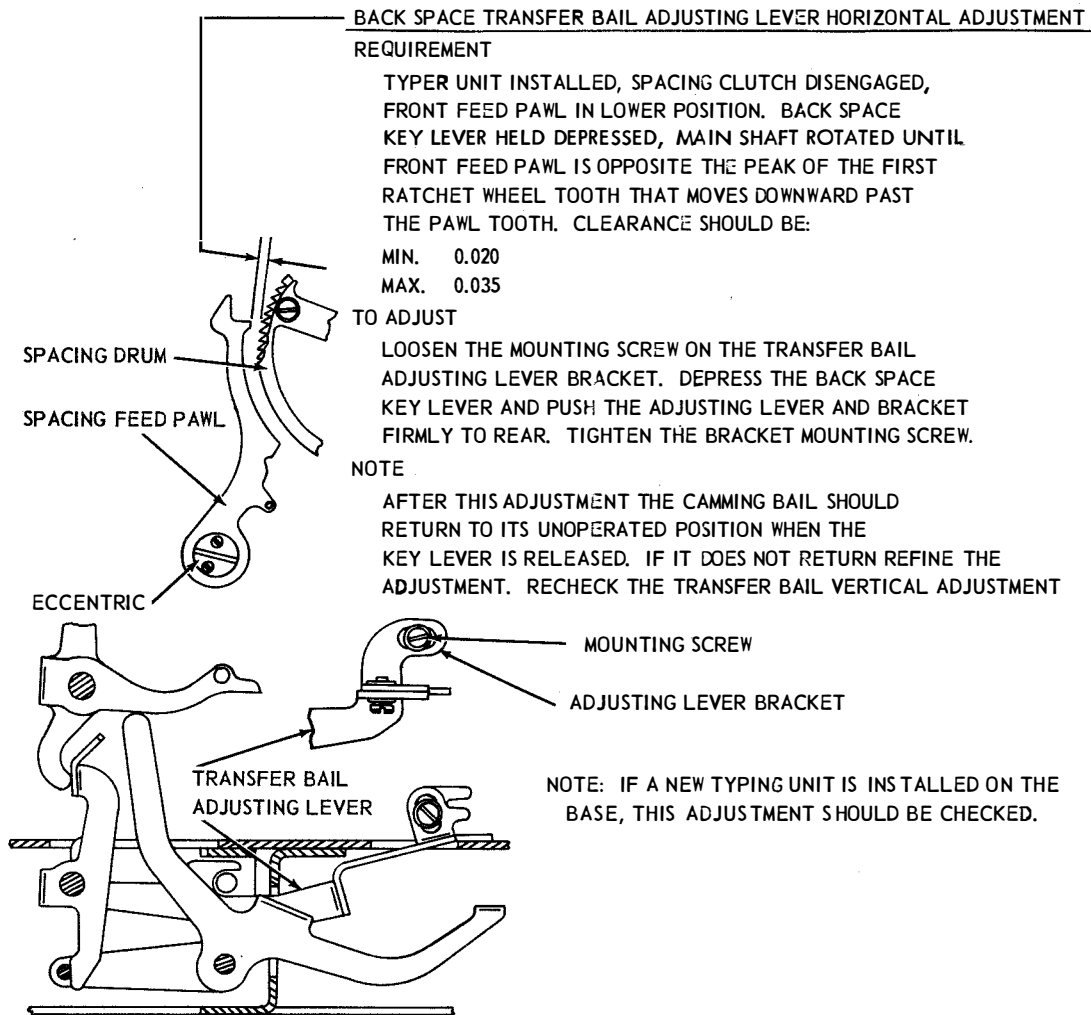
KEYBOARD, BACKSPACING MECHANISM
